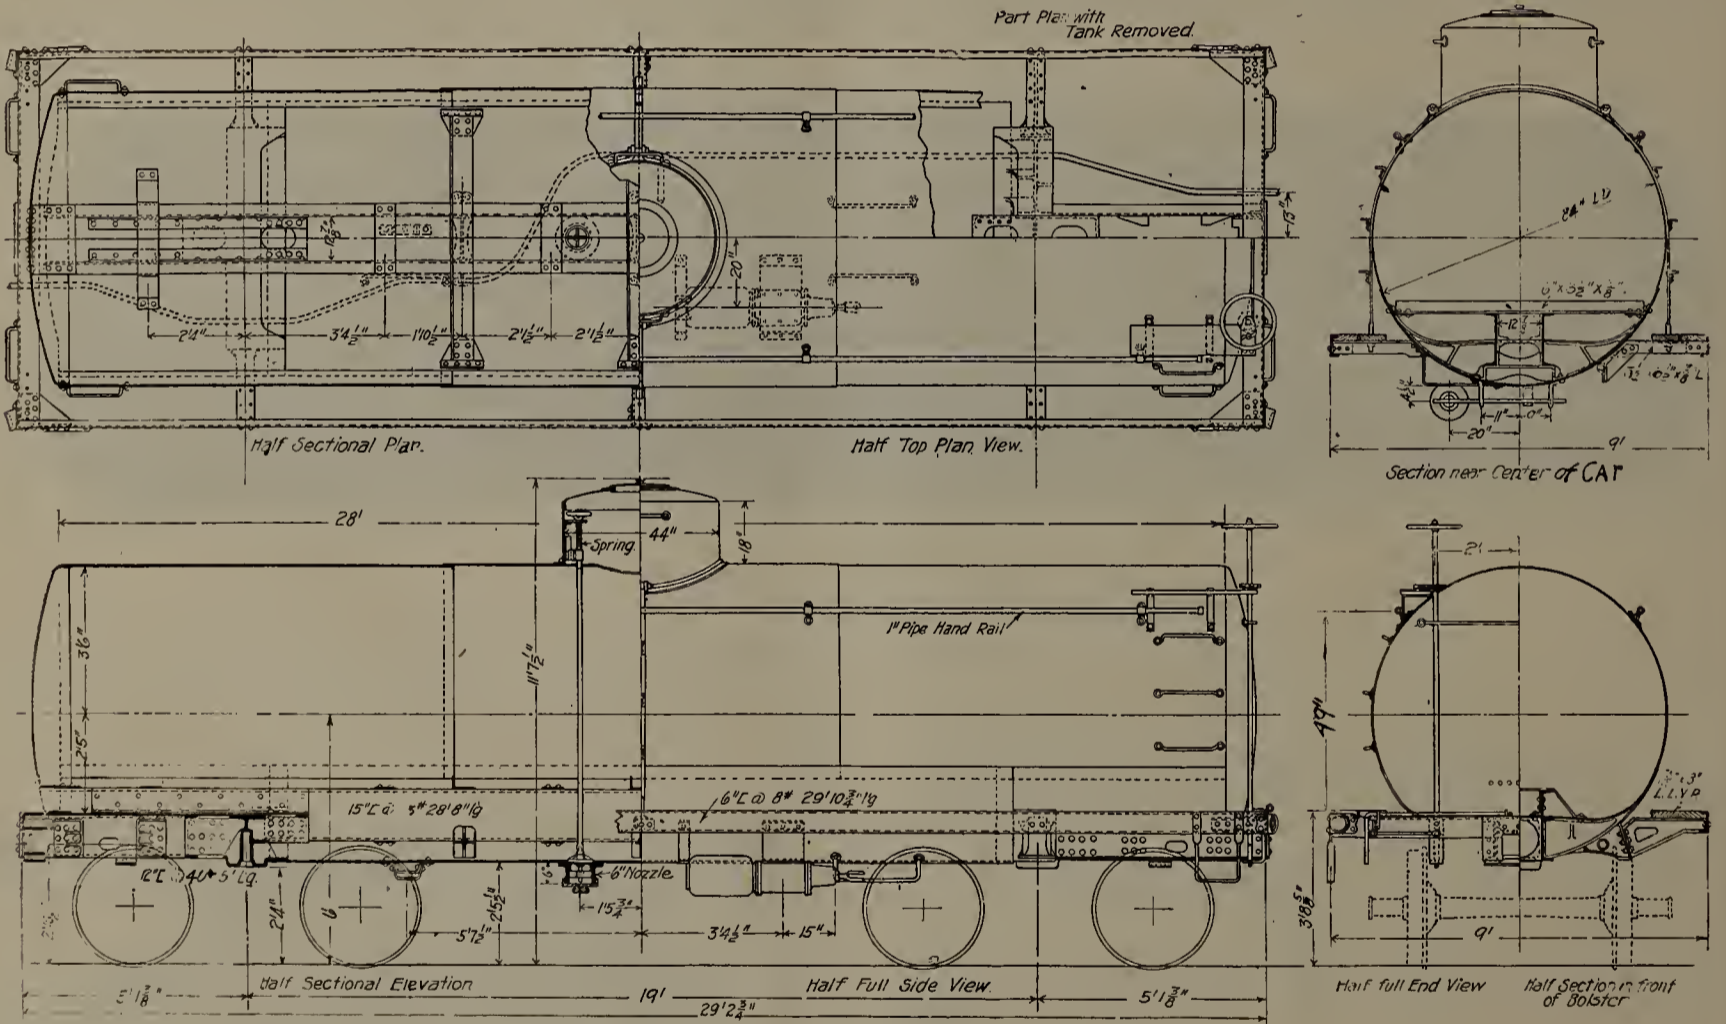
Elevation, Plan and Details of New Tank Car.
